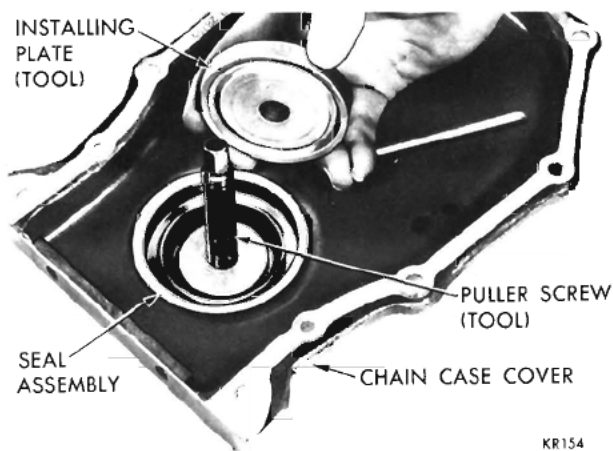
Positioning Installer Plate on New Seal Tool C-3506
